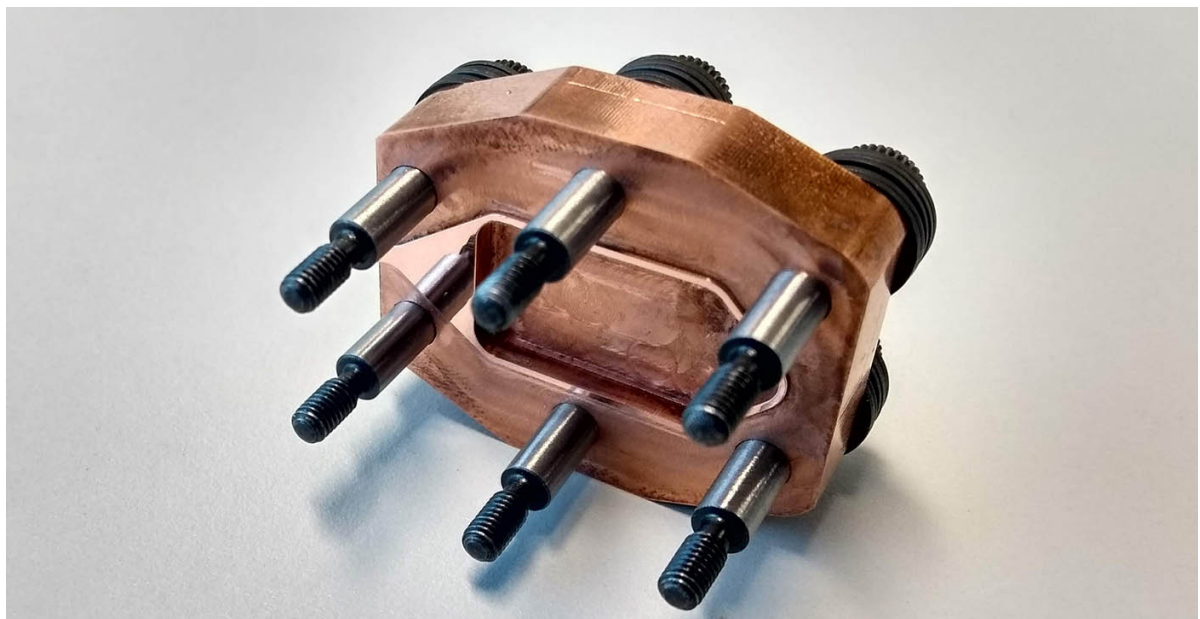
Polished bottom copper block with shoulder bolts inserted, showing the mirror finish of the sealing surface.
